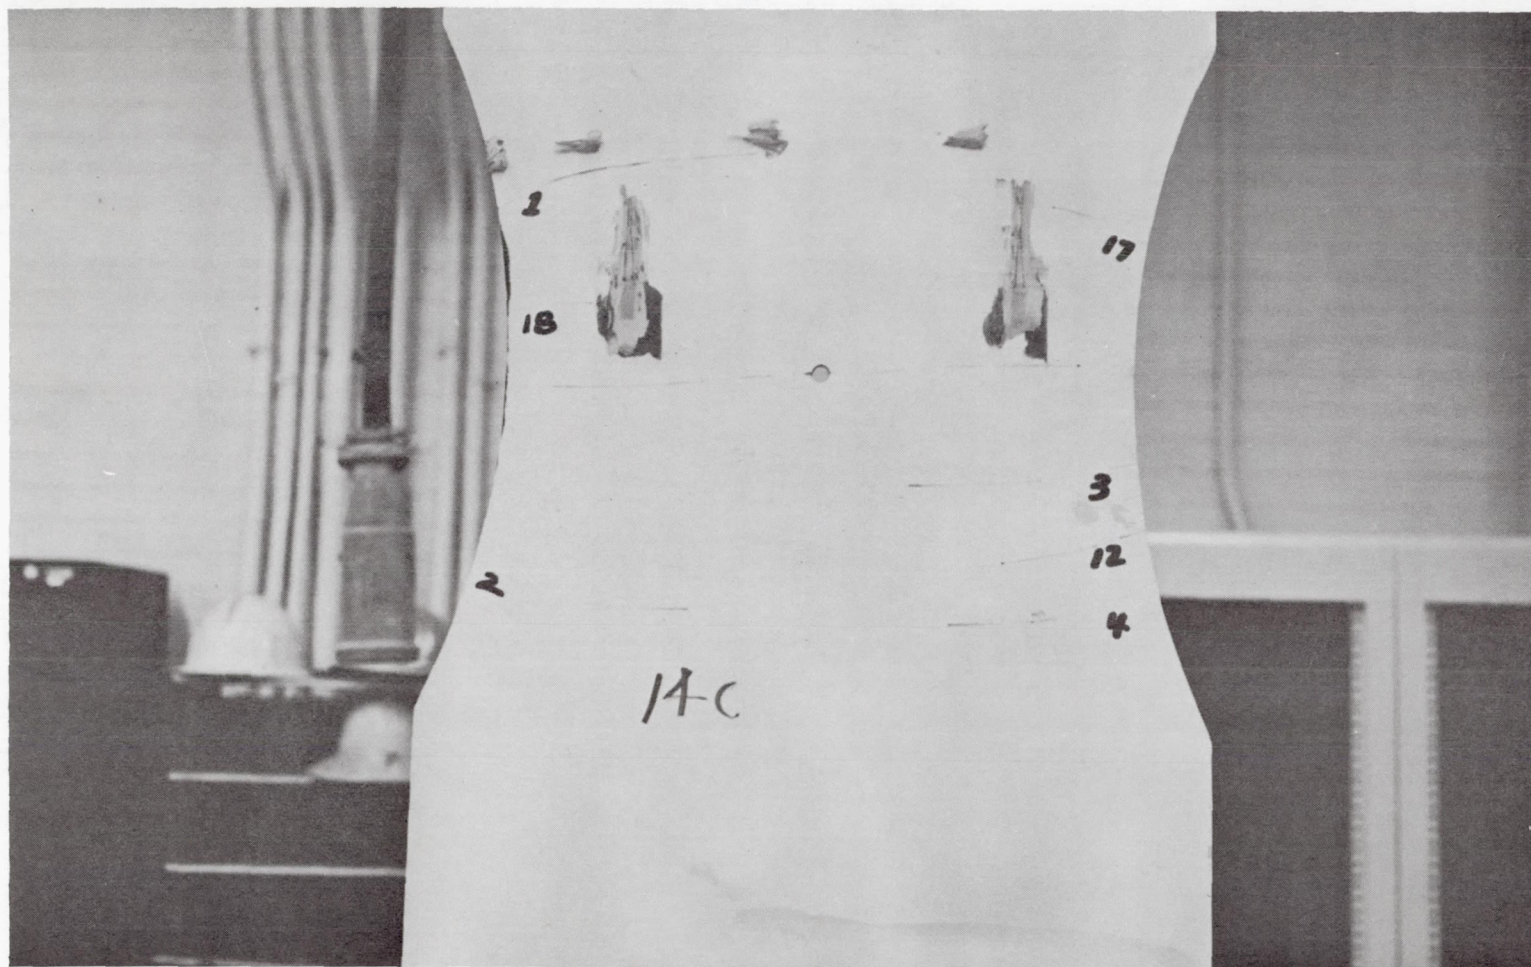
OUTSIDE FACE SHEET AFTER CRACK GROWTH TEST - PANEL #14C
